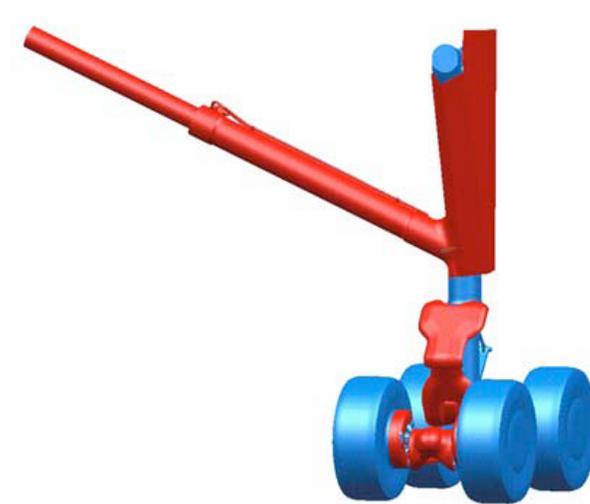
Main Landing Gear Assembly with Fairings^[20]
